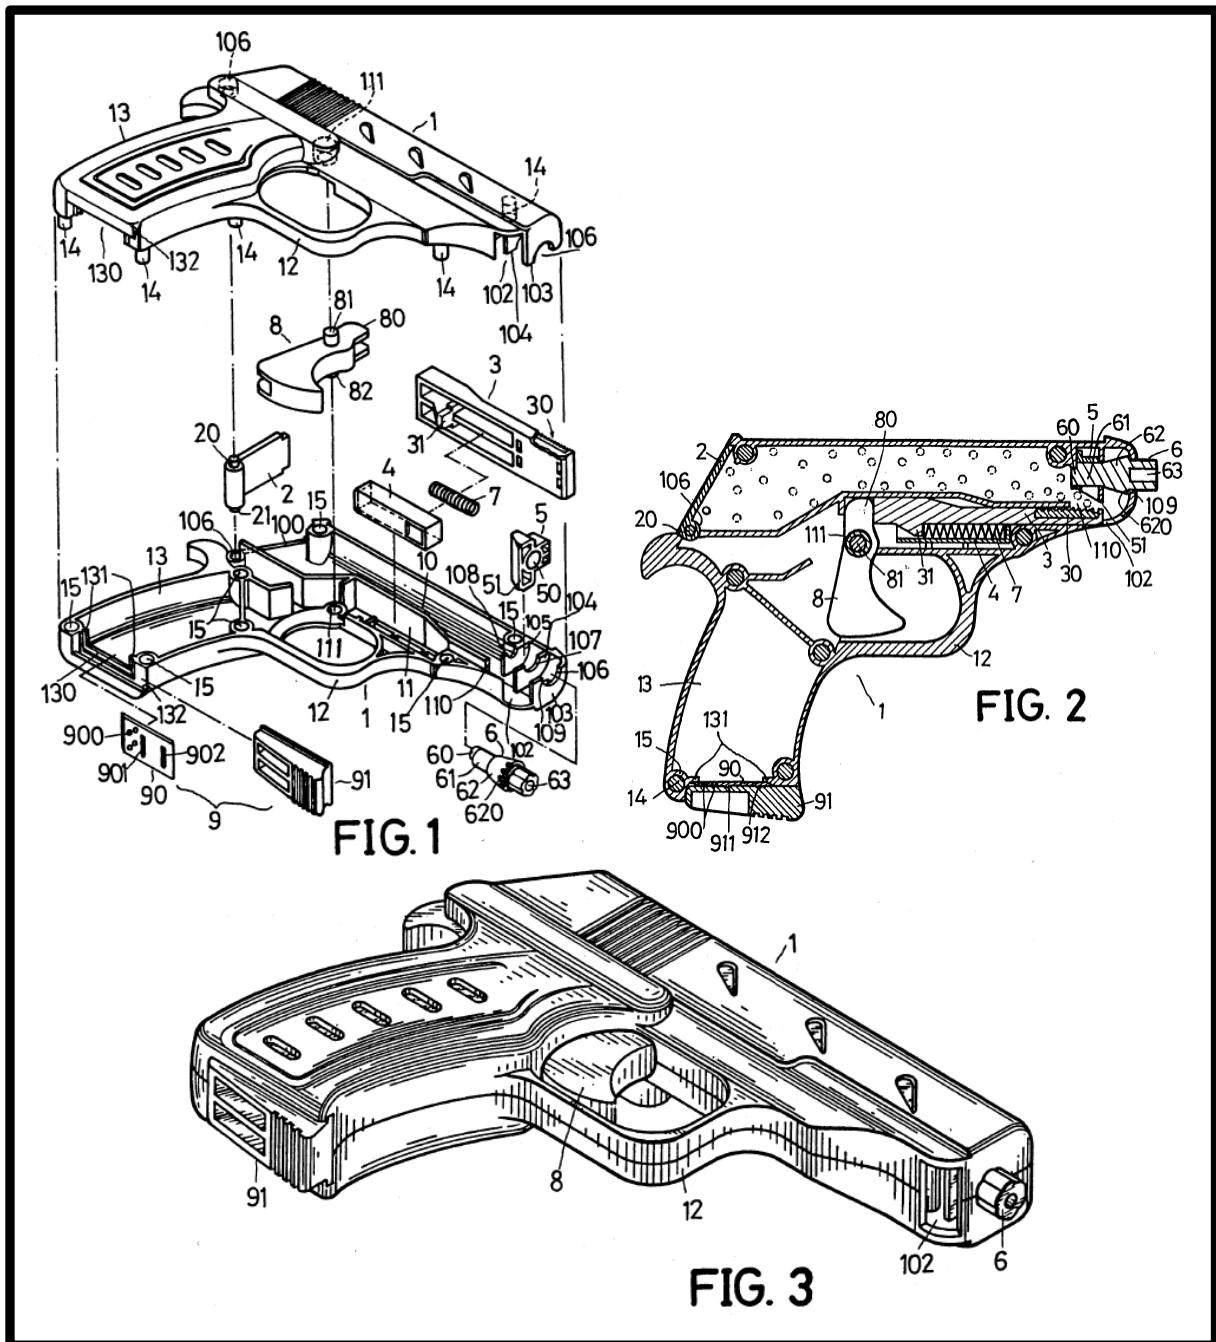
is an exploded perspective view of the pistol-shaped pepper grinder of the present invention.
